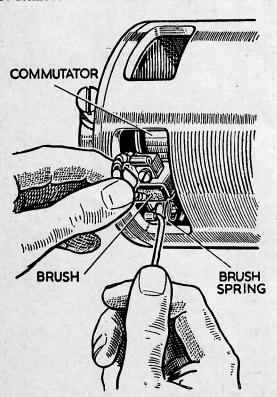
This drawing shows how spring pressure on the brush may be released.
